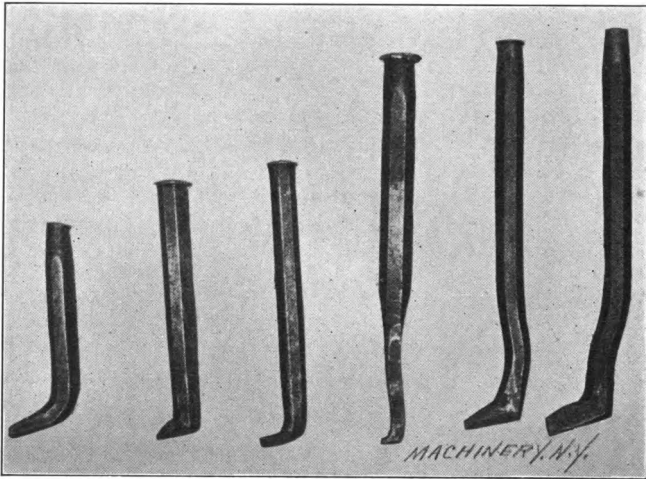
Staking Tools Used for Repairing Worn and Cracked Drop Forging Dies
